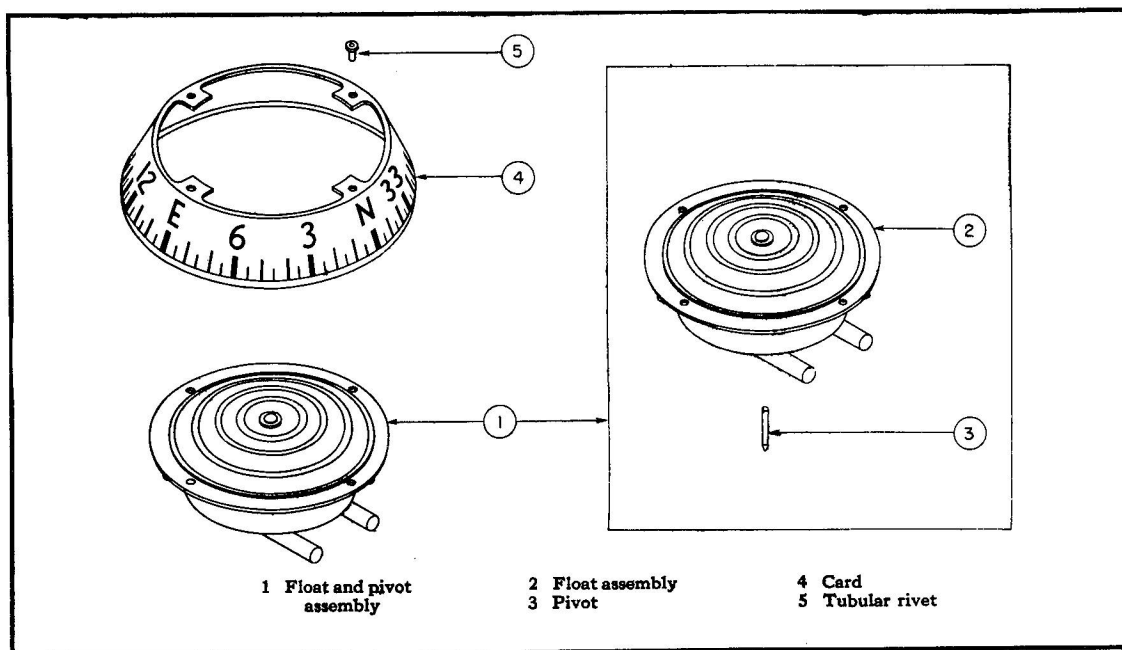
Exploded View - Compass - Card Assembly Type B-16, (Pioneer Types 1818-1-A, 1818-4-A, and 1821-2-A)
